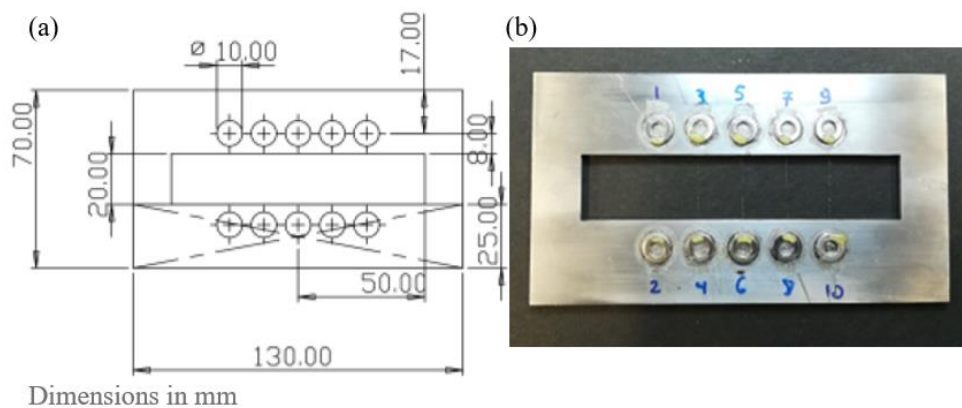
(a) CAD drawing of microbond rig with dimensions, (b) microbond rig containing single fibre, microbond specimens.
